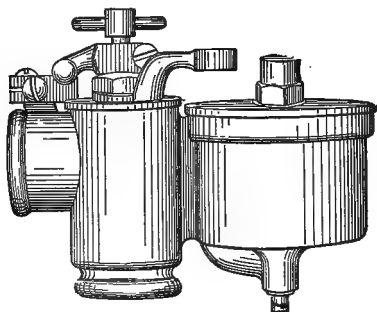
Exterior View of One Model Kingston Carburetor.
